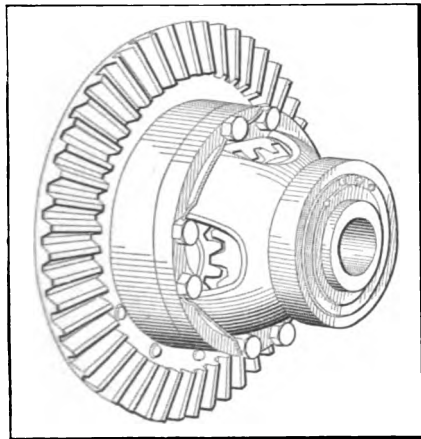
Differential unit, showing how the crown wheel and ball-bearings are mounted on the cage
